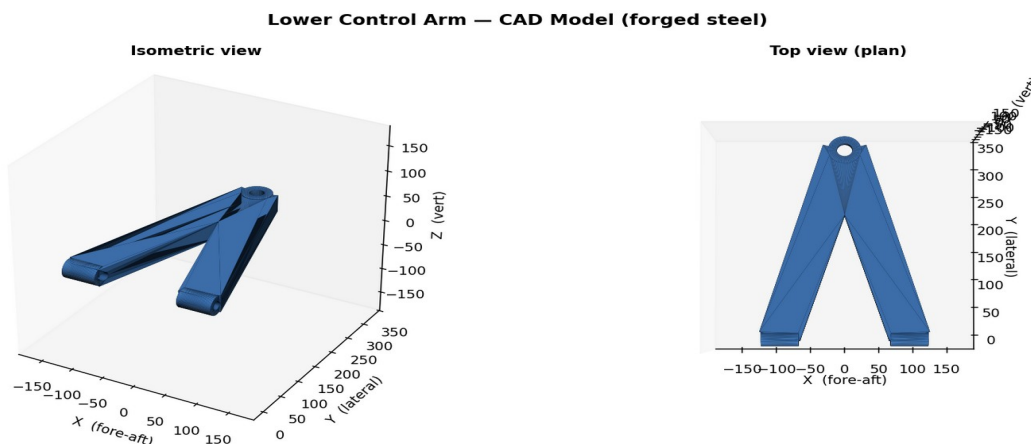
Isometric and plan views of the lower control arm CAD model.
